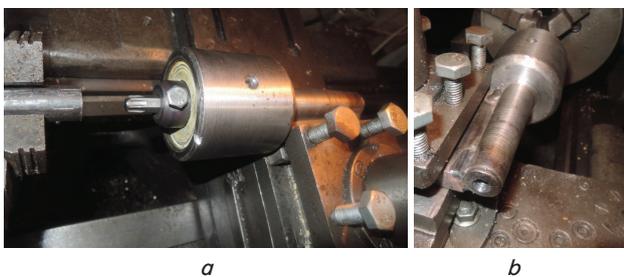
Rotational head from rotating center: *a* – view of rotational head; *b* – method of fixing in the tool carrier
